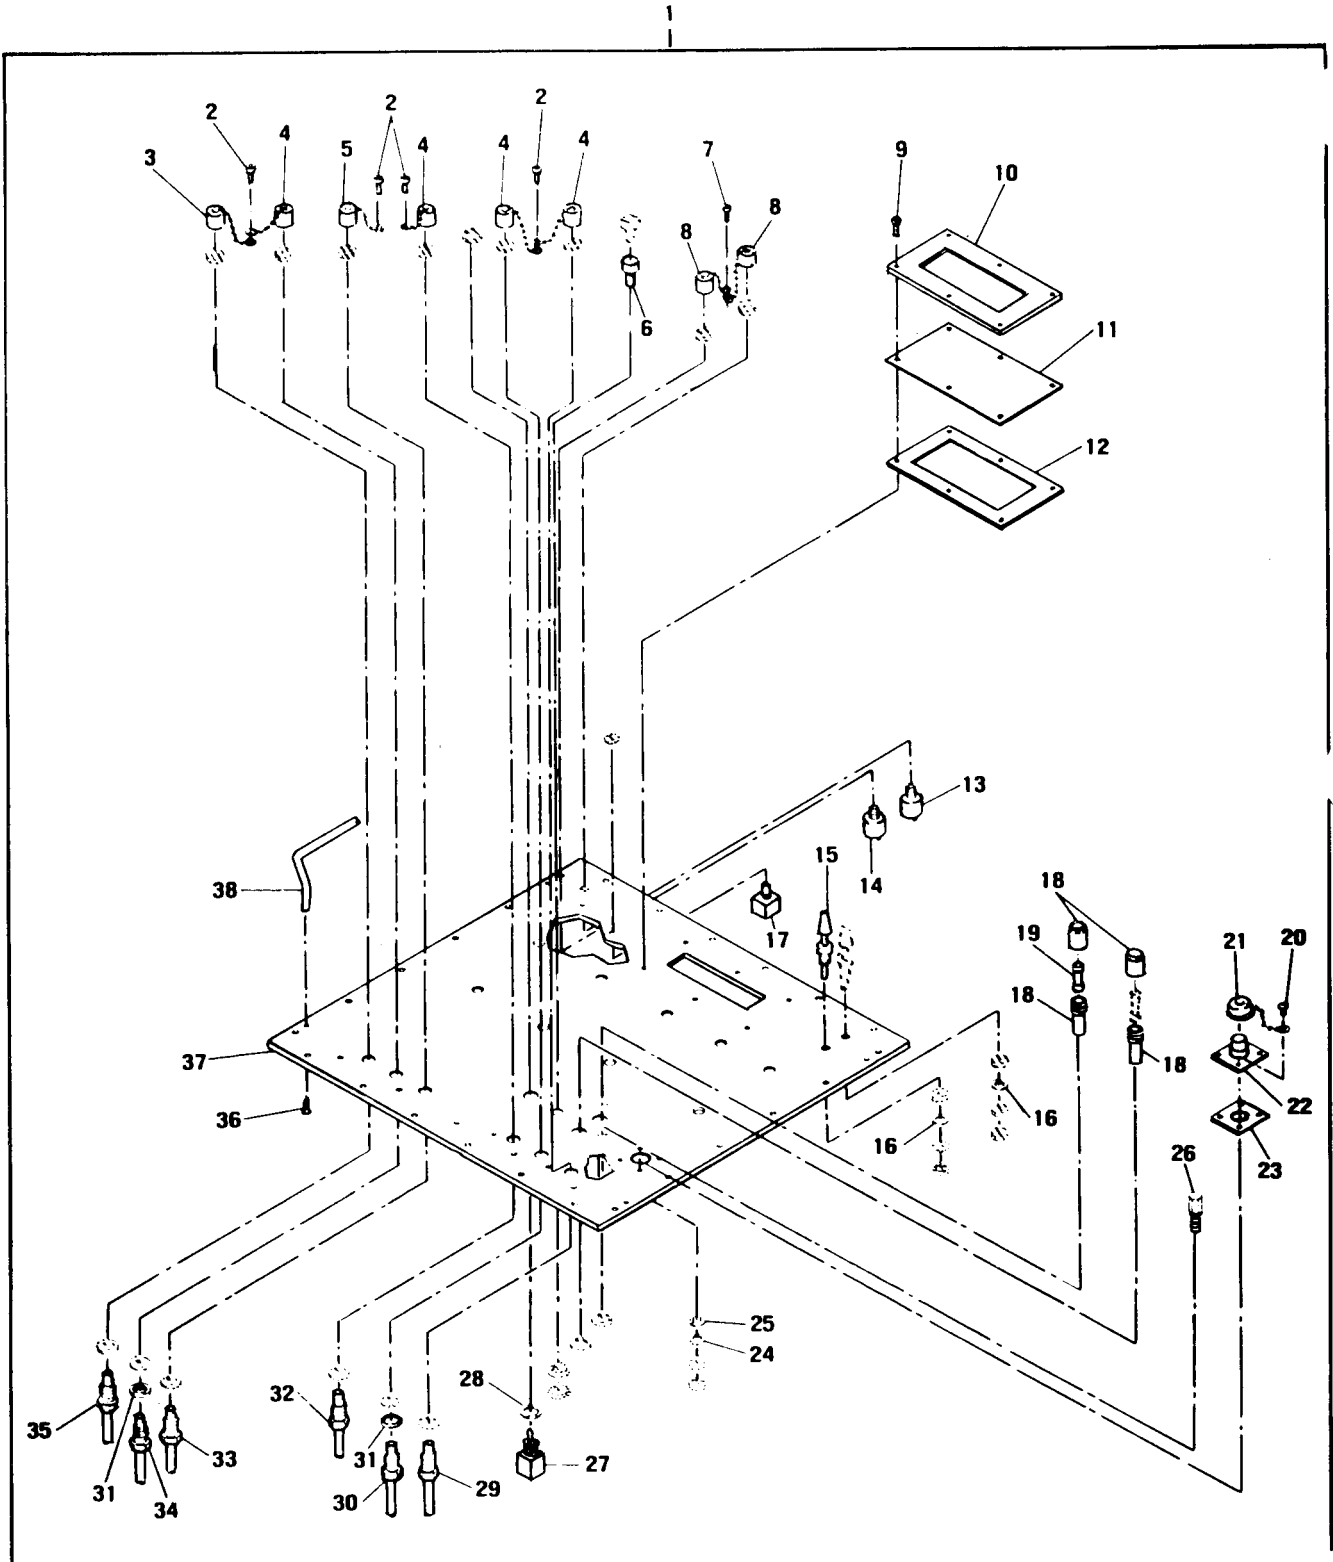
Panel assembly, part number 504-013-001-exploded view.
